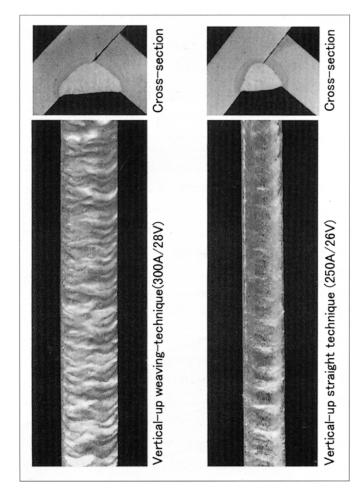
Typical bead profiles of DW-100V, offering smoother surface and sufficient weld penetration in vertical-up welding by means of the weaving and straight techniques (wire dia: 1.2 mmØ)
